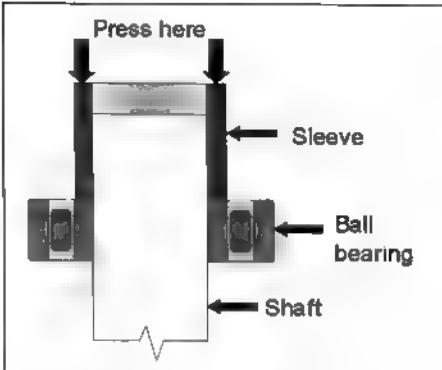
Use a sleeve pressing on the inner race to push the bearing onto the shaft.
